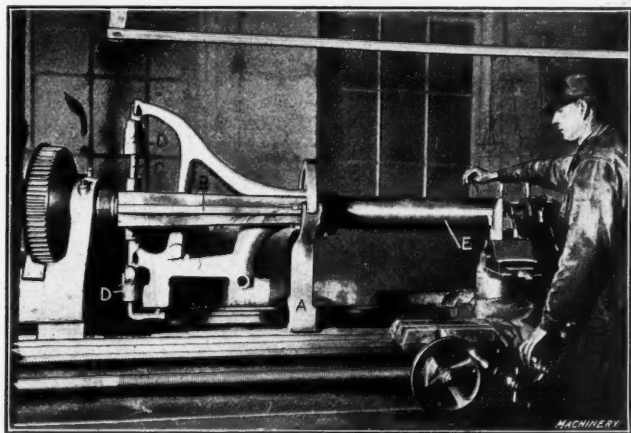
Fixture used on the Lathe for holding Upright Drilling Machine Columns while turning
